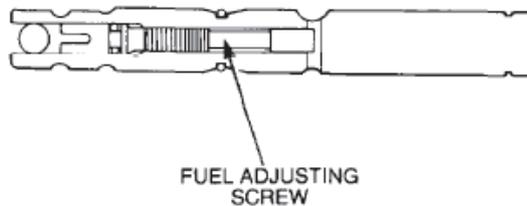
Throttle Shaft and Fuel Adjusting Screw
